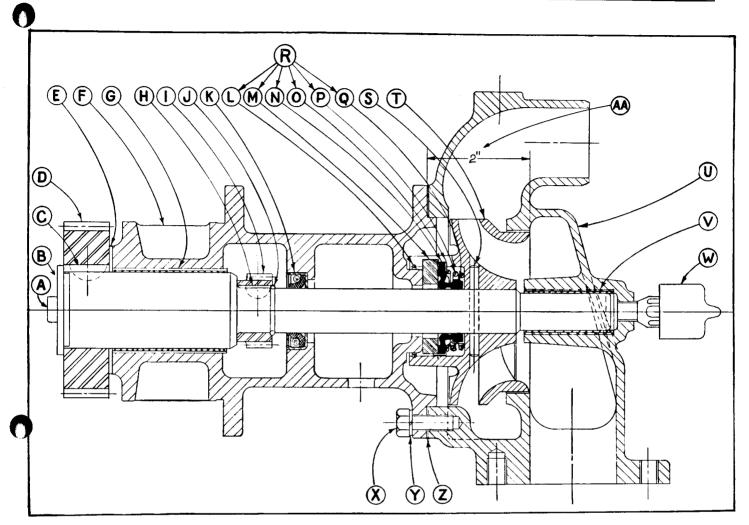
Illustration No. 75 shows a longitudinal section through the water pump commonly used with distributor ignition. It is of the packless or auto seal type. This pump may be readily removed from the engine after the cooling system is drained. Remove water discharge pipe, water inlet pipe, disconnect primary wire from distributor and remove distributor cap, then remove three capscrews holding water pump to cylinder block. The water pump can now be pulled back out of the cylinder block.
